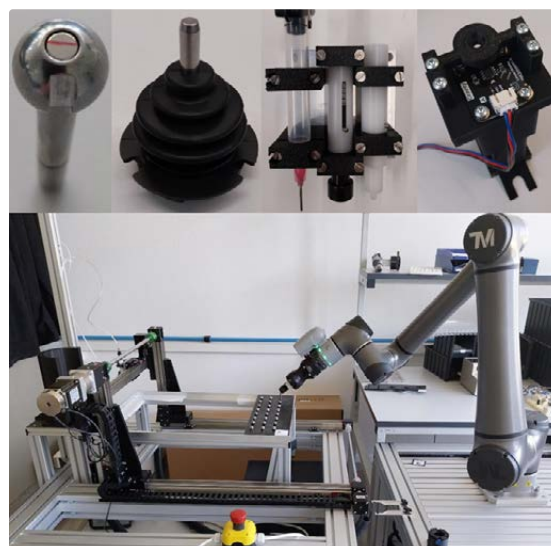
Top: rod, joystick, robot tools, QC tool. Bottom: portal and TM12S robots.
